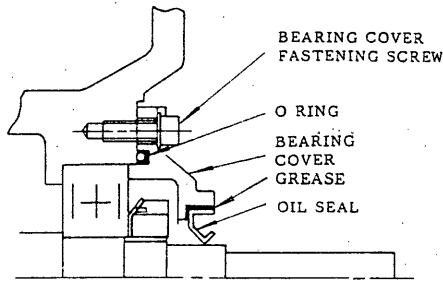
Construction of Bearing Section with Oil Seal and O Ring
